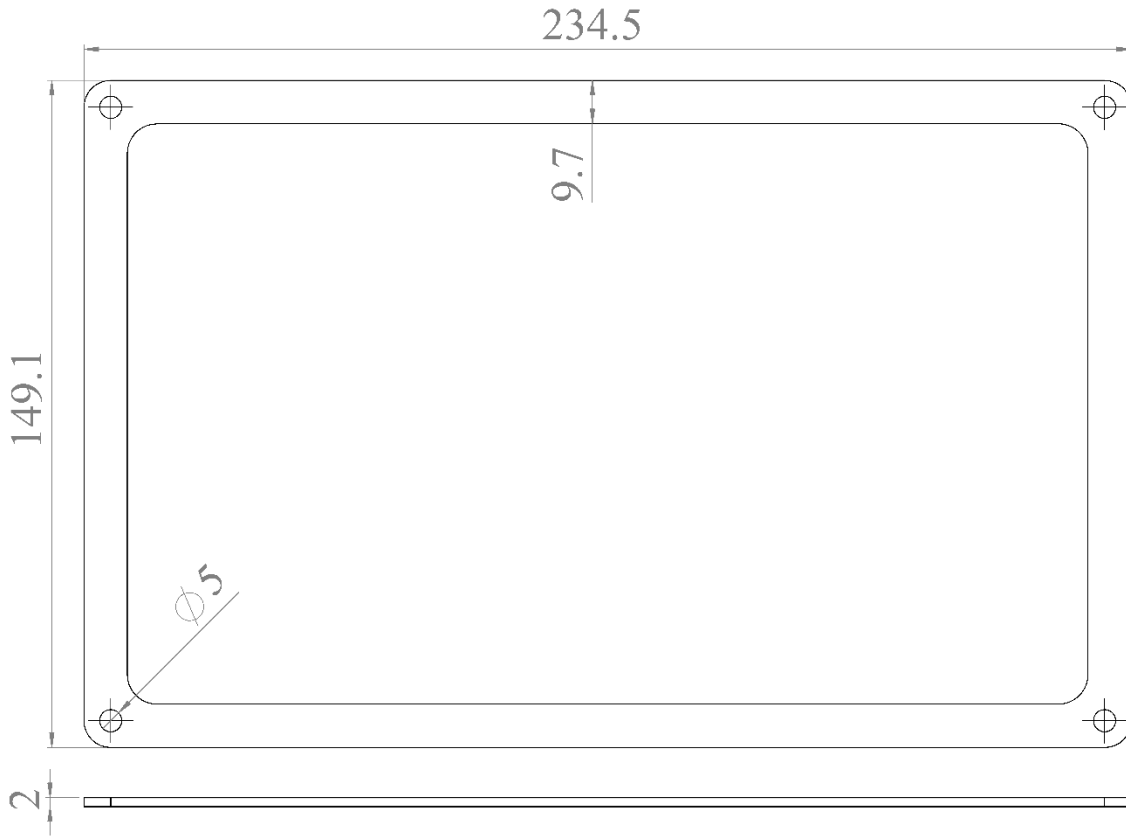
Dimensioned drawing of the spacer, all dimensions are in mm
